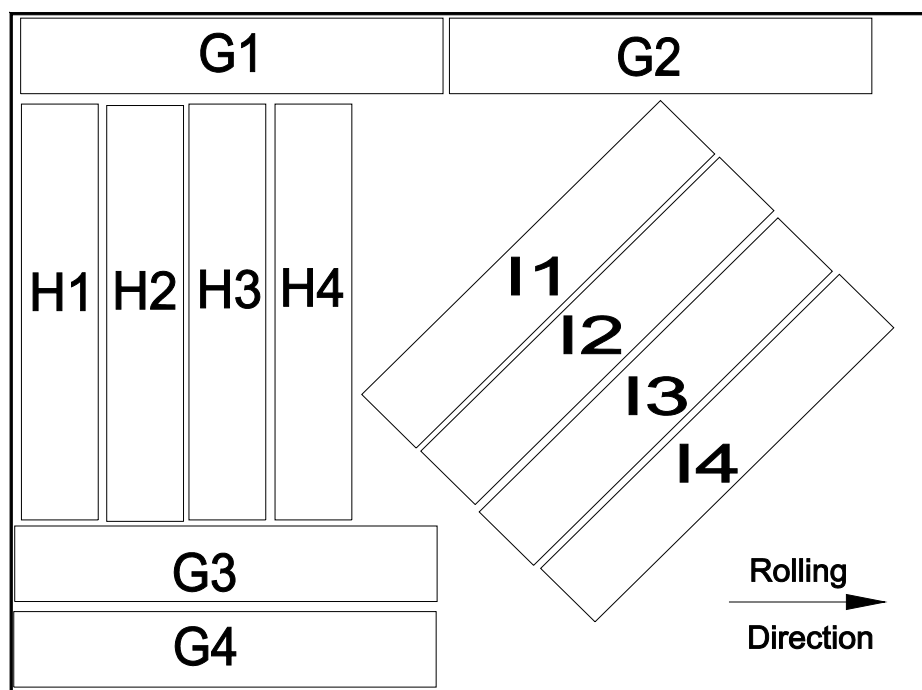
LAYOUT OF SPECIMENS G THROUGH I ON 9" X 12" Al 2024-T3 SHEET
